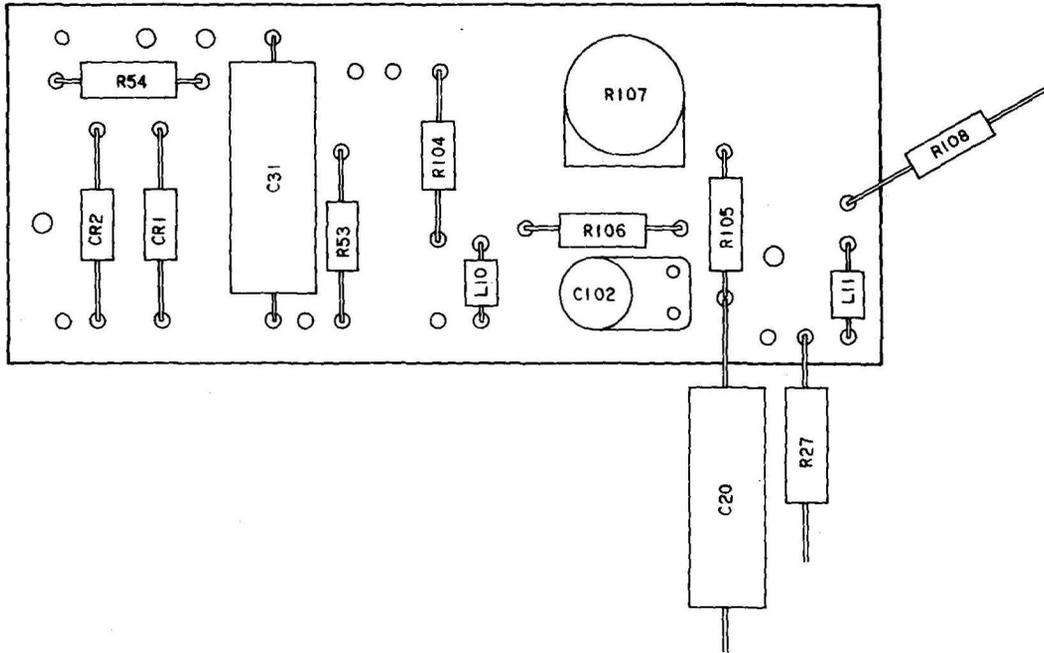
Printed Circuit Board Assembly, Part No. 400D-75F—Models Listed in 1.06
